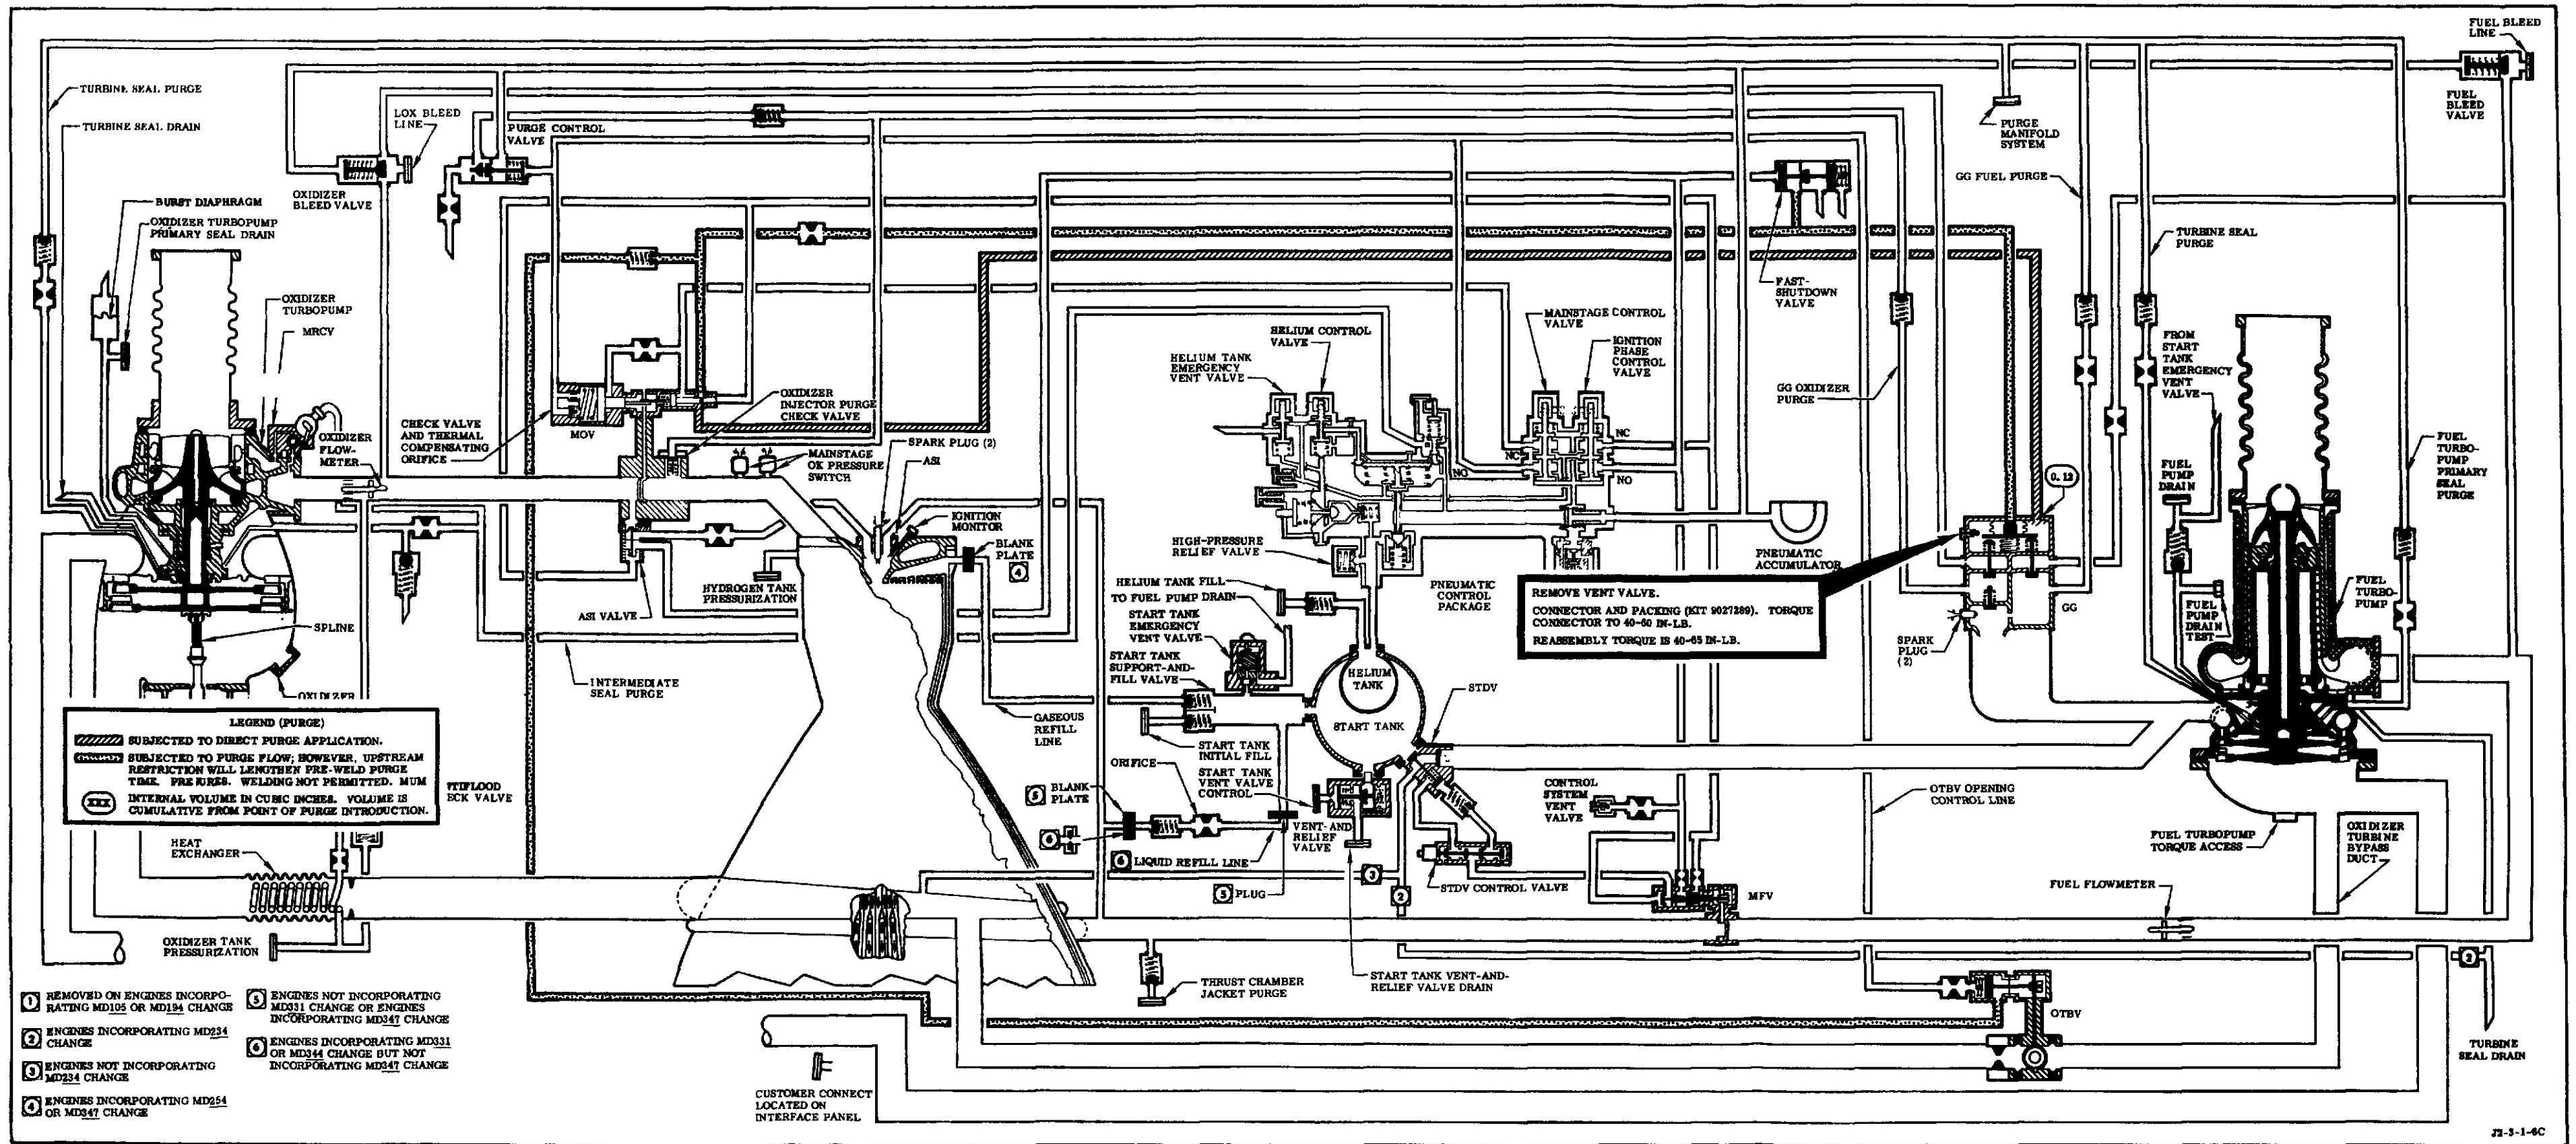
Engine Purge Schematics for In-Place Tube Welding (Sheet 6 of 13)
